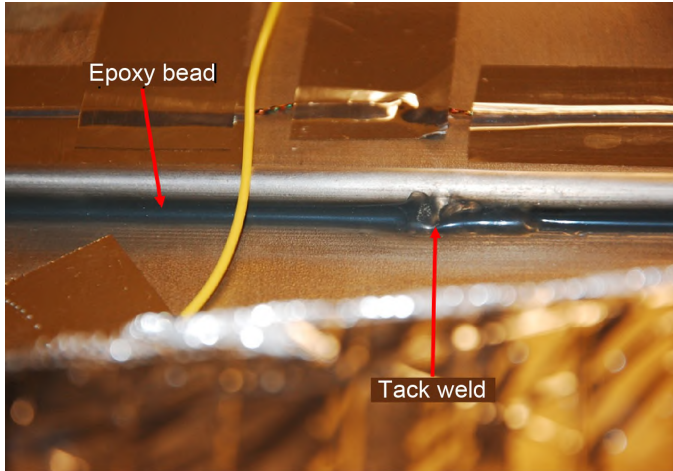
Zoomed-in view of the tube attachment via both epoxy and tack weld.
